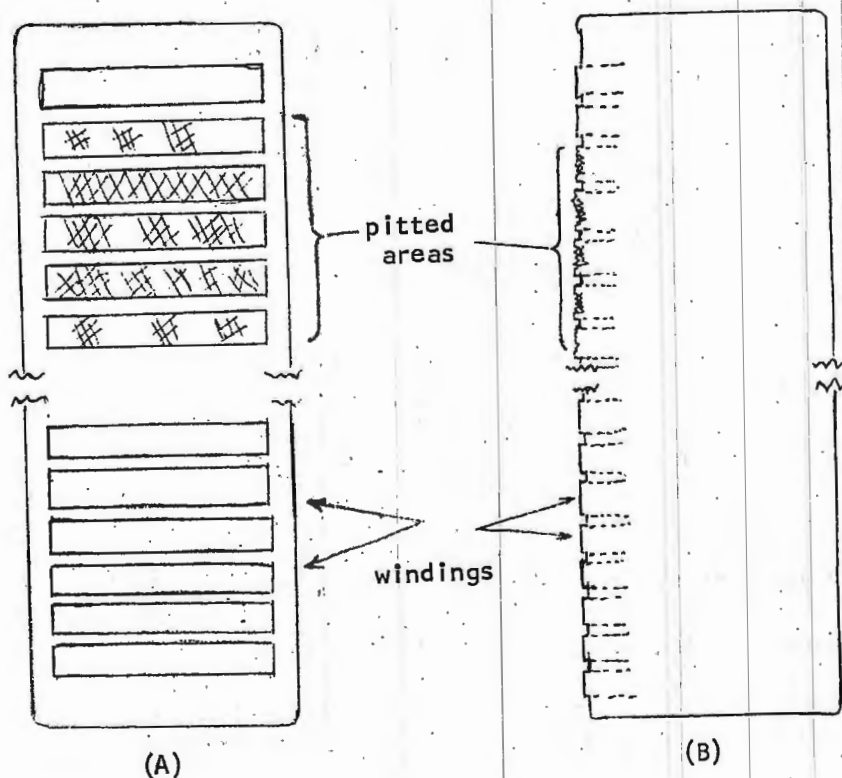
Diagram showing front (A) and side (B) views of damaged V 2708 transformer pole.
